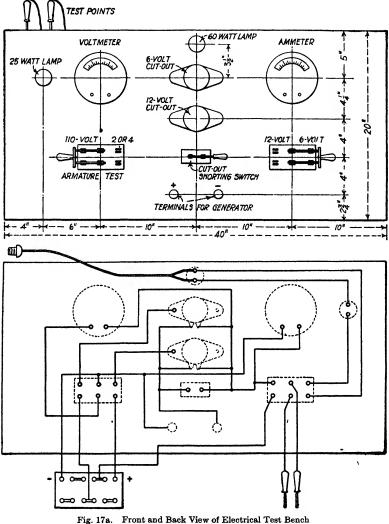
Electrical Test Bench Courtesy of Motor Age
